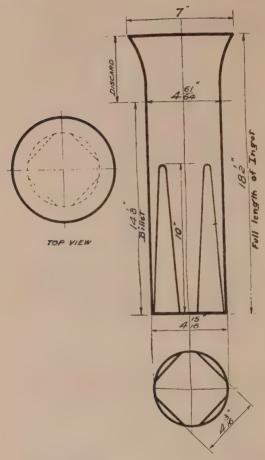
Special Design of Cast Steel Billet for 4.5-inch Shells.
